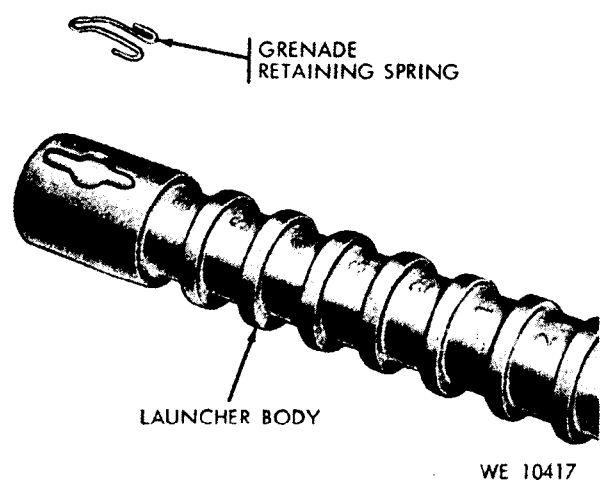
Disassembly/assembly of grenade launcher M7A3.
